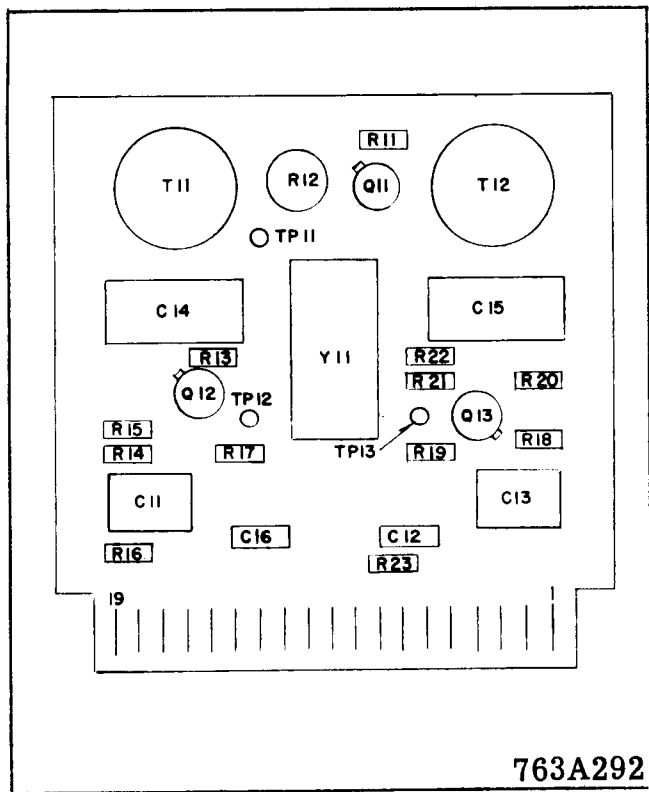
Component Locations on the Oscillator and Mixer Printed Circuit Board.
